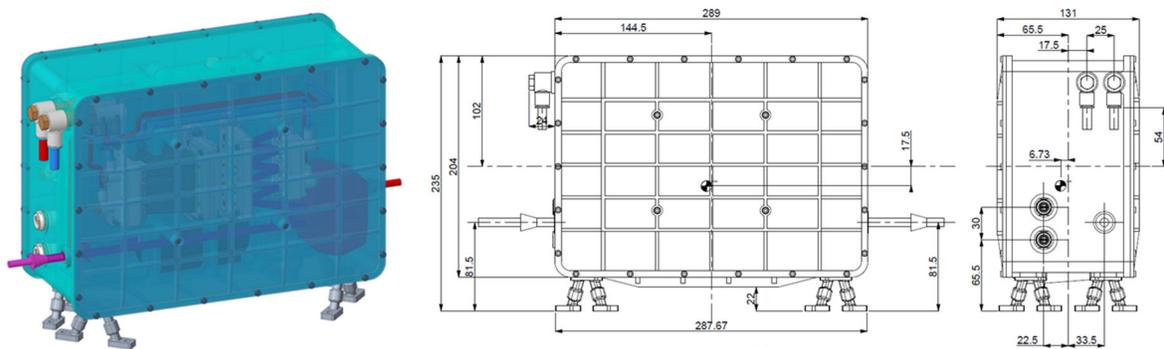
CAD drawing of the elegant breadboard, with main dimensions
